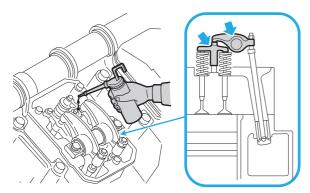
Engine Oil - Apply (Valve Mechanism)
